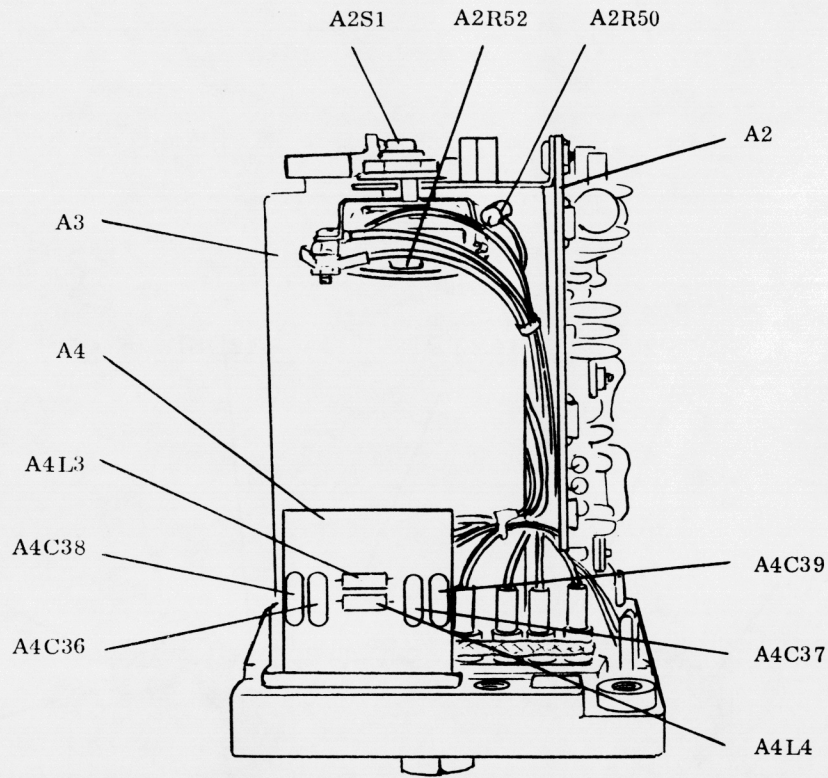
Frequency Standard Assembly A2A5, Housing Removed, Top View
